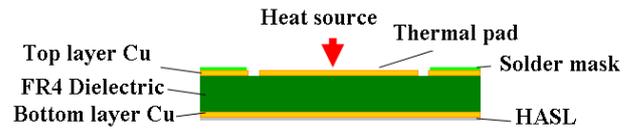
FR4 cross-sectional geometry. HASL - Hot Air Solder Level
